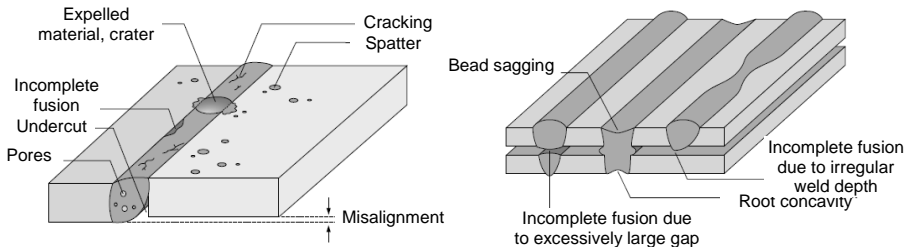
External and internal weld defects that can occur in laser welding of (a) a butt joint and (b) a lap joint.
